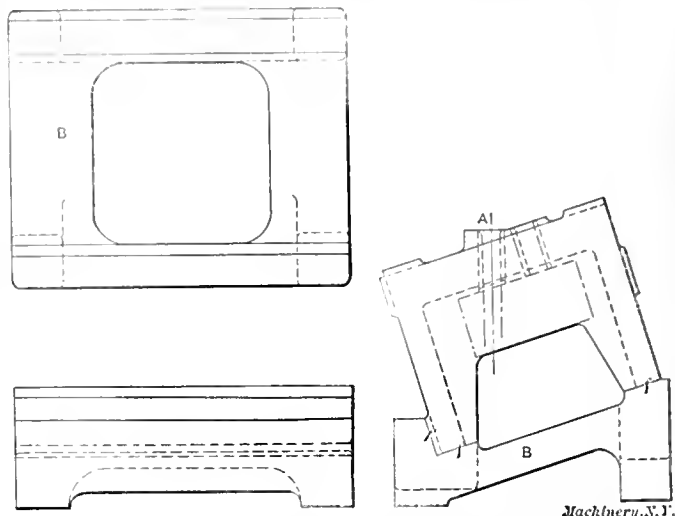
Jig and Stand for Drilling Holes at an Angle.
